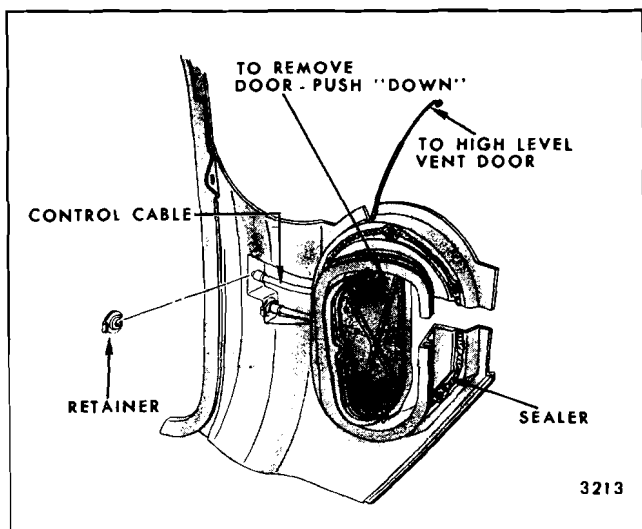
Shroud Side Finishing Panel Sealing - All Styles Except "E" and "Z-67"
